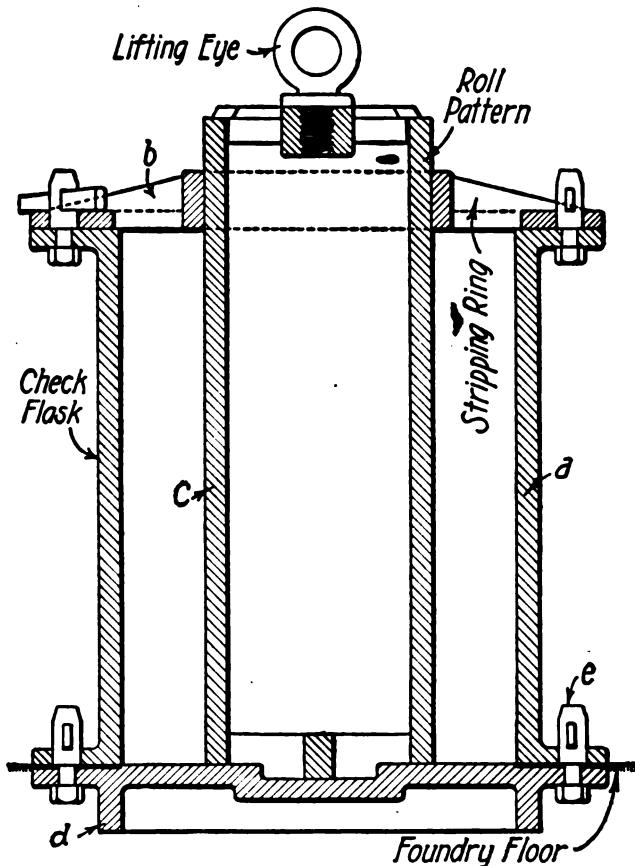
Section of Cheek Mold on Mold Plate and Stripping Ring in Place
